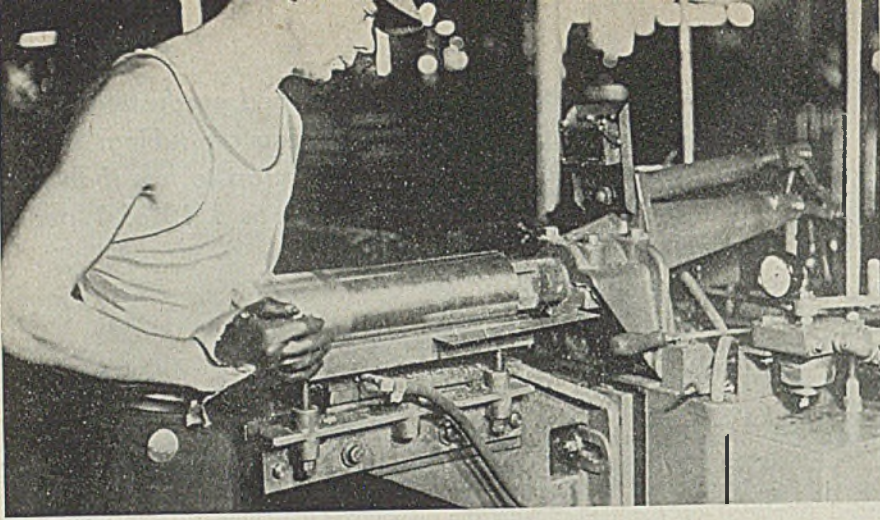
Spot welder makes eight welds along each edge of vane on this special setup. Operations 23 and 24, Table I
